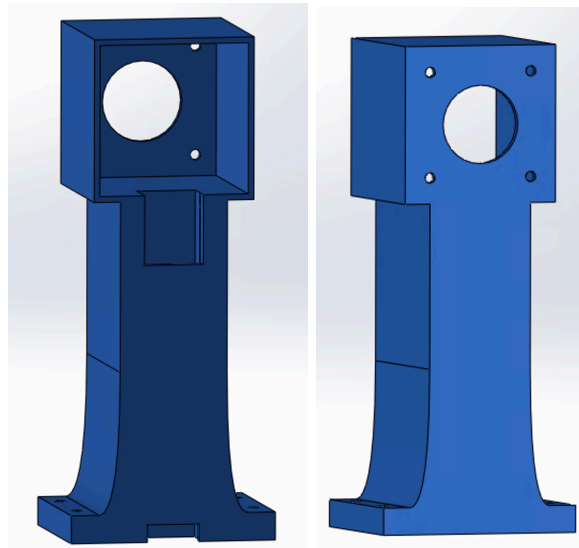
Iteration 3 knob motor stands with built in wire cutout.
